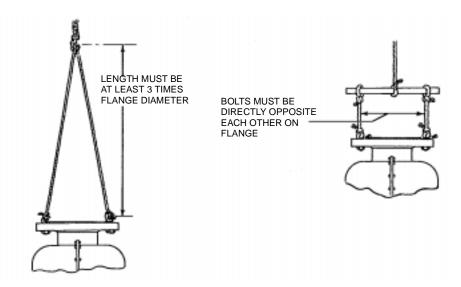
Lifting Flanged Flowtube for Vertical Mounting (14- to 36-in Size Shown)
